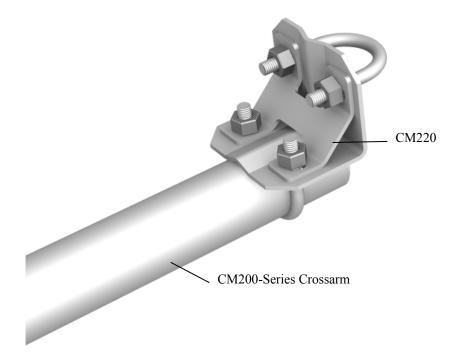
CM220 Right Angle Mounting Kit mounted to a crossarm
